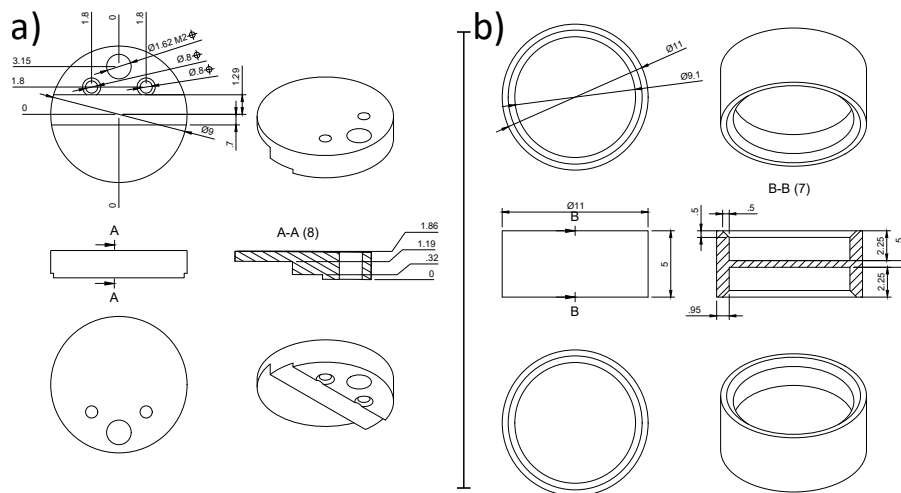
(a) Mini-hot plate for DRIFT measurements and (b) removable powders holder.
